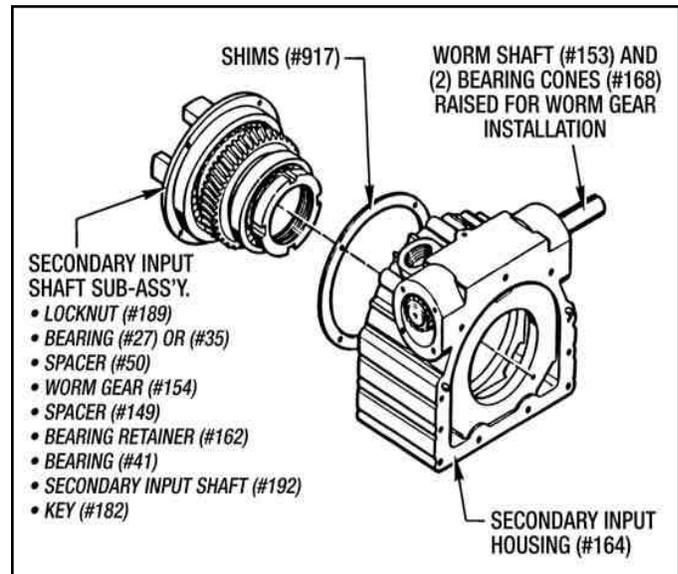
Removing Secondary Input Shaft Sub-Assembly
